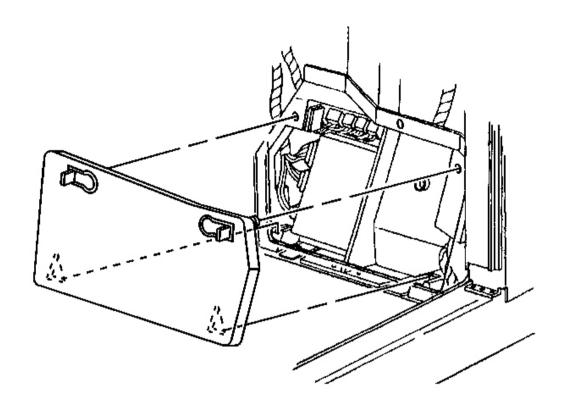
Passenger Side Front Floor Kick Up Panel To IP Electrical Center Courtesy of GENERAL MOTORS CORP.
